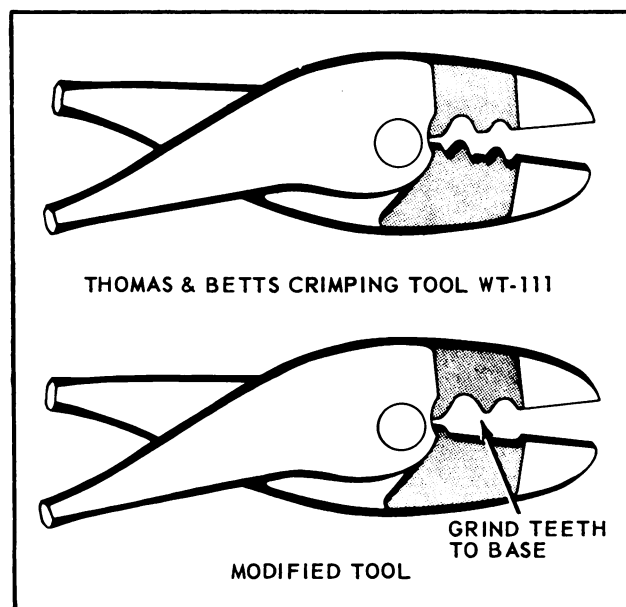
Modified Crimping Tool for Thermocouple Terminals
